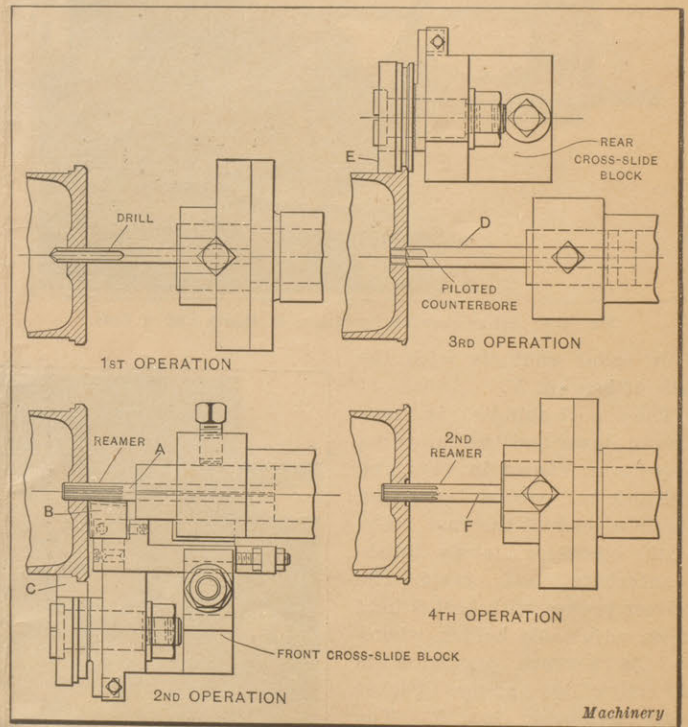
Diagram illustrating Machining Operations on French Cartridge Case on Potter & Johnston Machine
